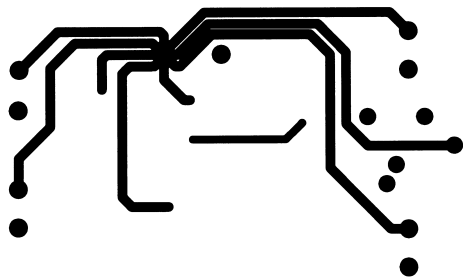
Recommended SOIC PC Board Layout: Bottom Layer
